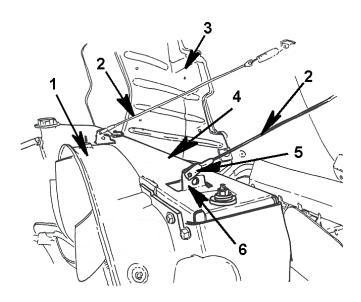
Radiator Top Frame And Cable Stop Assemblies
